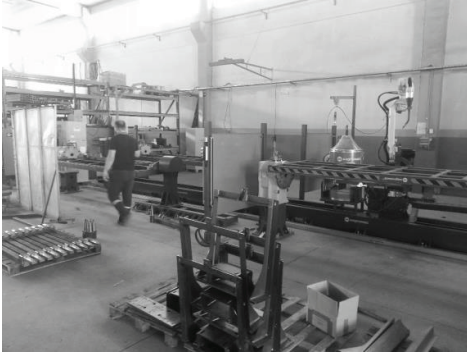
Robot welding used during welding of field sprayer chassis and booms
